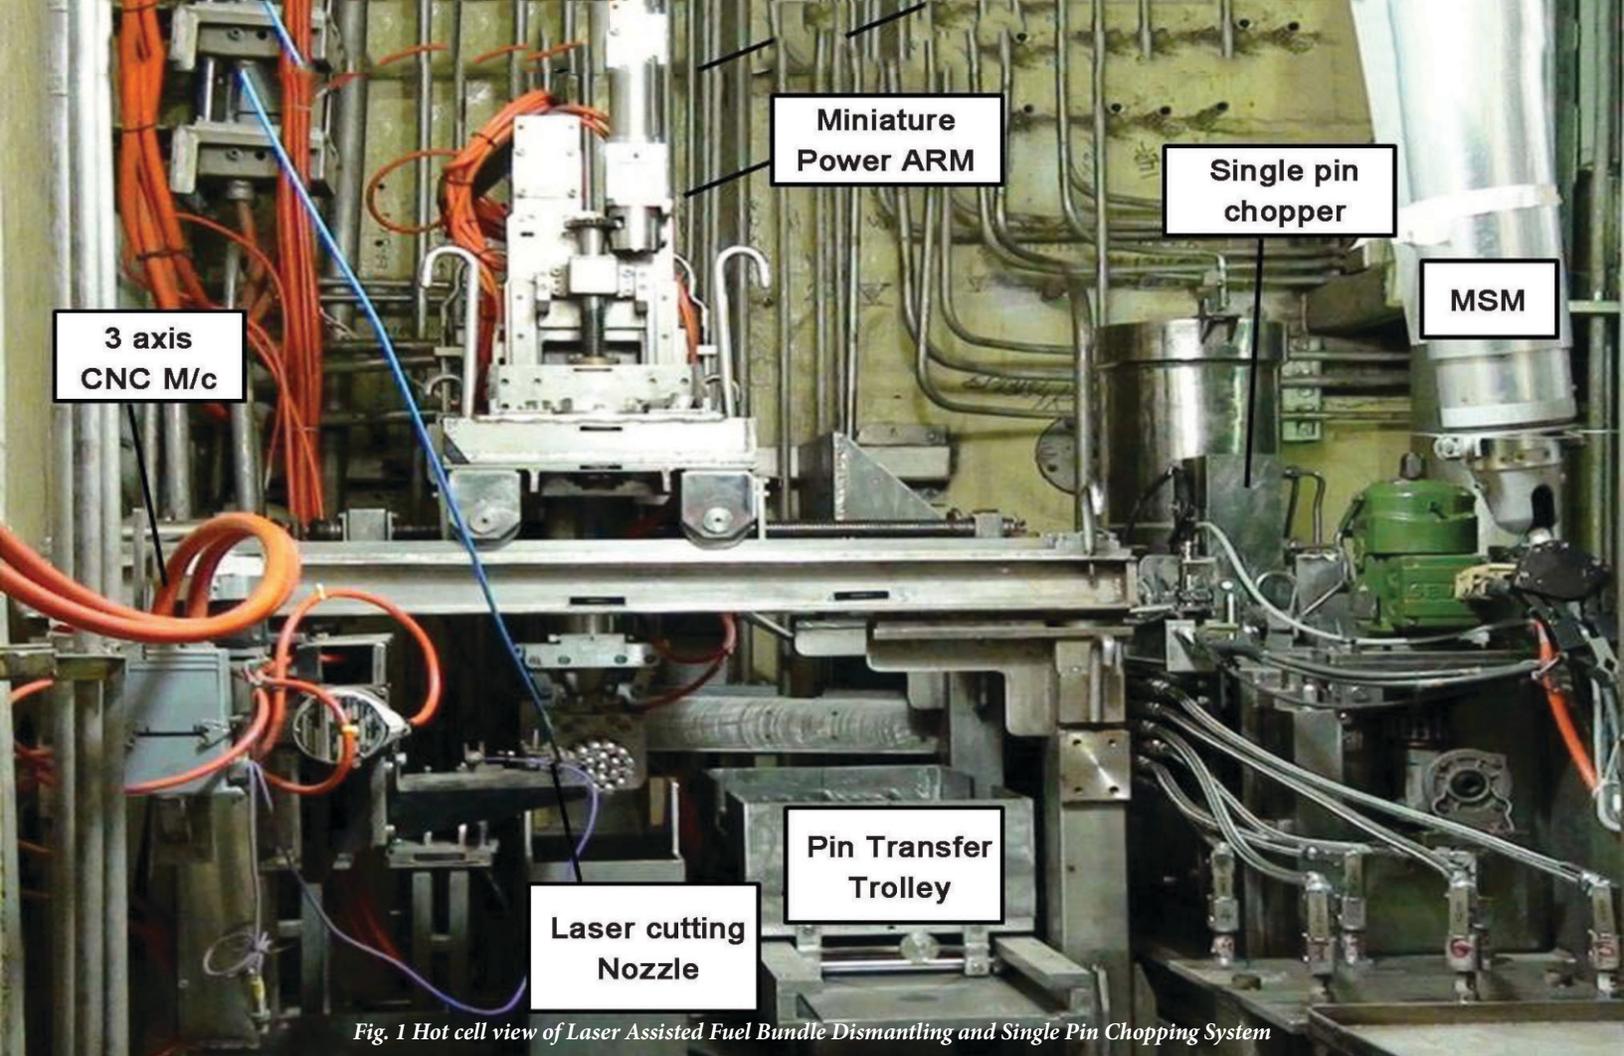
Hot cell view of Laser Assisted Fuel Bundle Dismantling and Single Pin Chopping System
